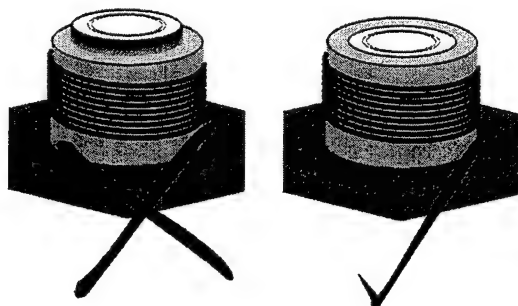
Correct positioning with the end of the transducer flush with the base of the thread adaptor.
